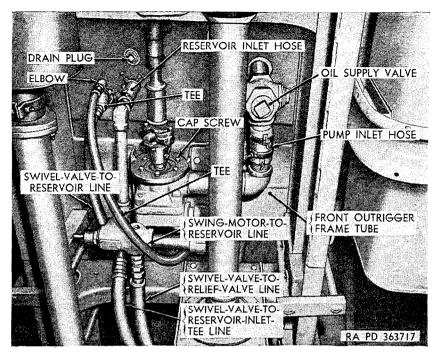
Front bottom view of hydraulic pump and relief valve assembly installed M246.
